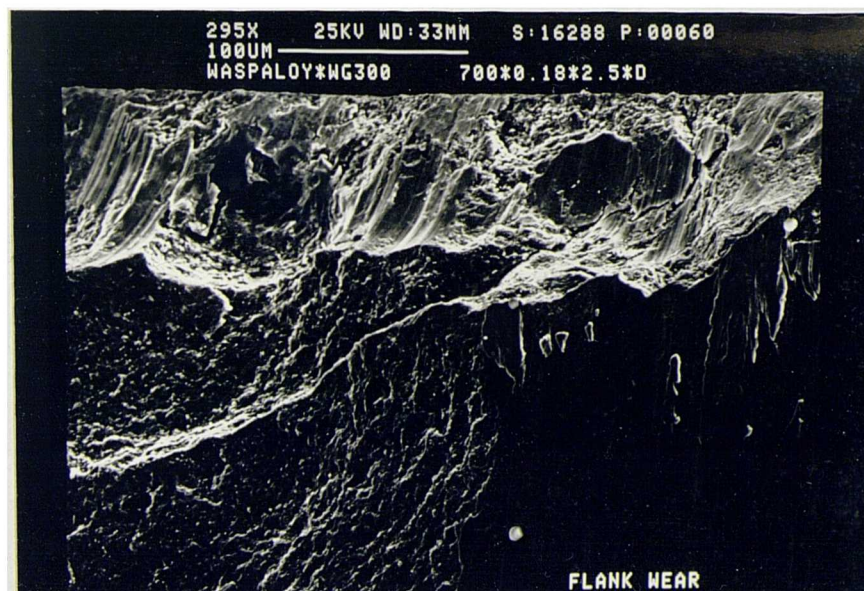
Cracks at the flank face of WG300 used to machine Waspaloy (V=215m/min, DOC=2.5mm, F=0.18mm/rev, Dry)
